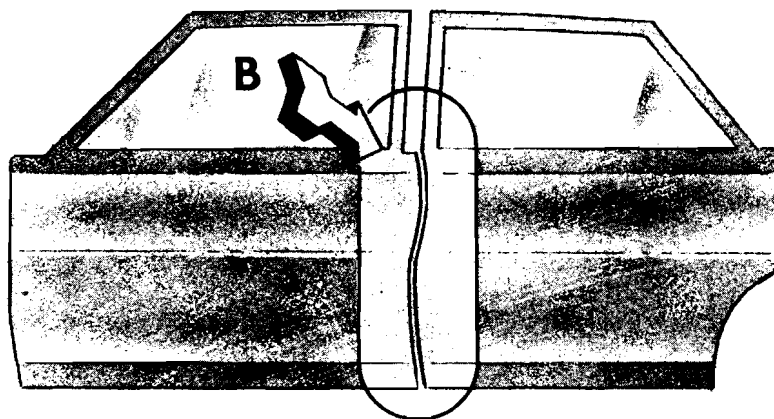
Specified Body Opening Clearance Tolerances - "A" Styles
